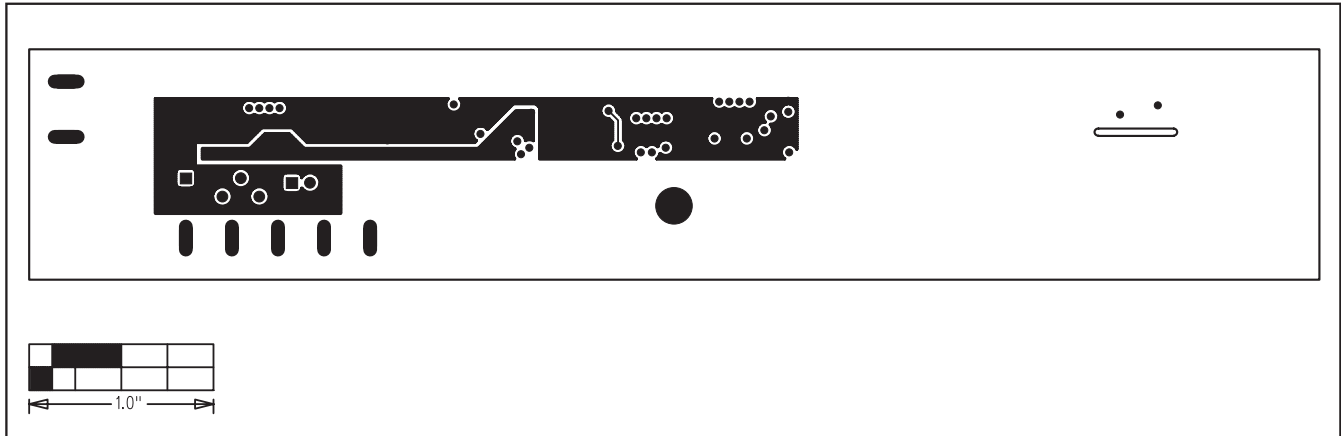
MAX8722 EV Kit PC Board Layout—Layer 2
